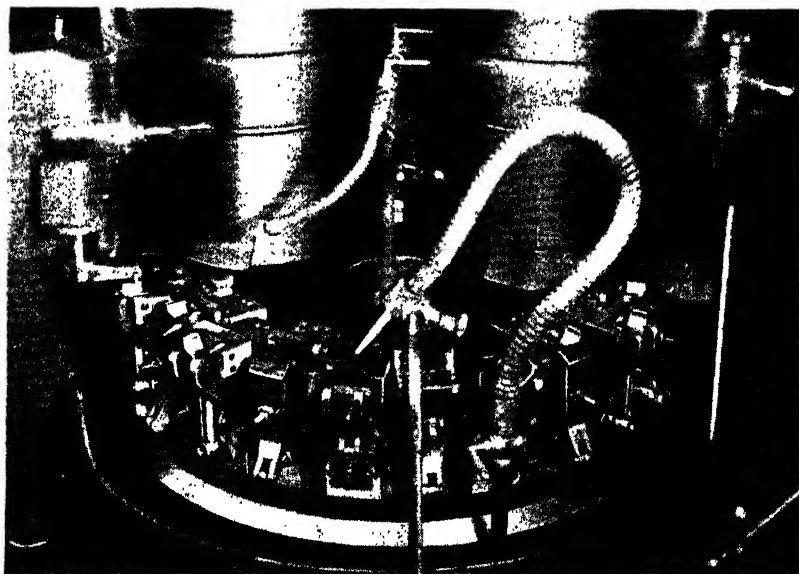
Grinding Joint Faces of Connecting-rods and Their Caps
